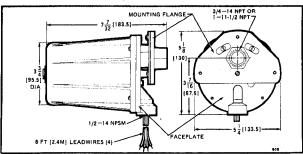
DIMENSIONS OF THE C7012A IN INCHES [MILLIMETRES SHOWN IN BRACKETS].
